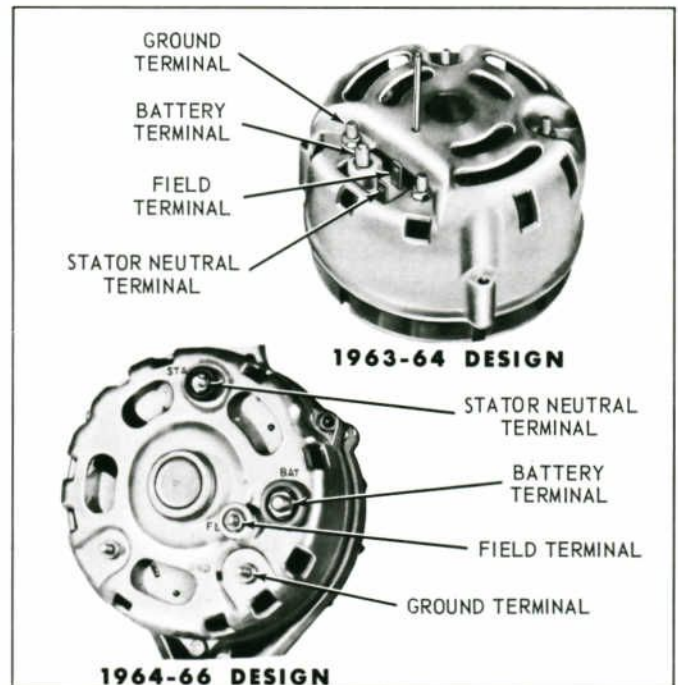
REAR HOUSING AND TERMINAL LOCATIONS
